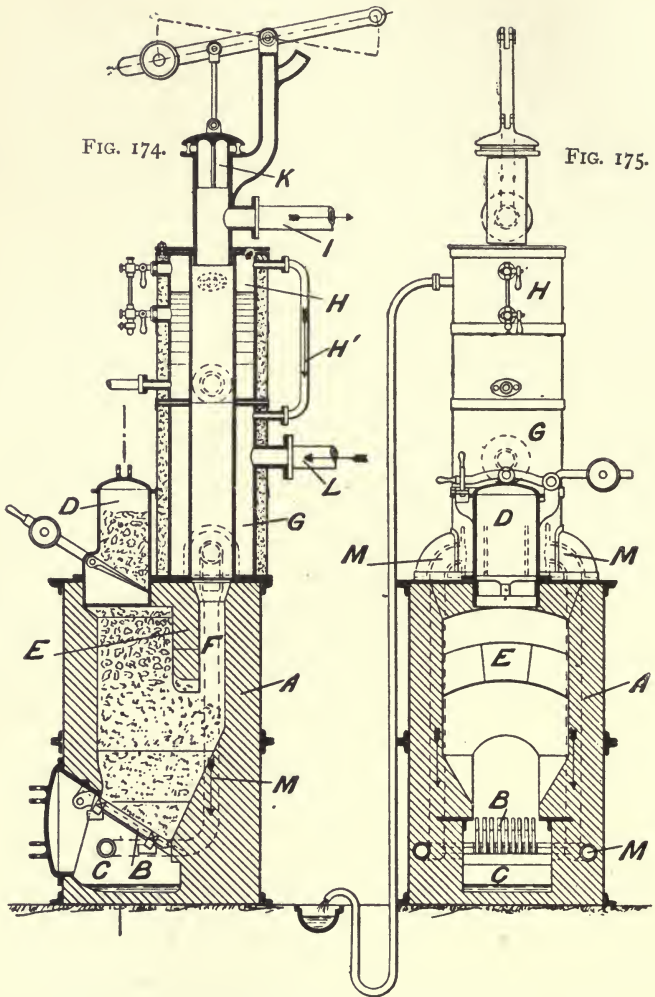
Lencauchez Gas Producer (vertical side section).
